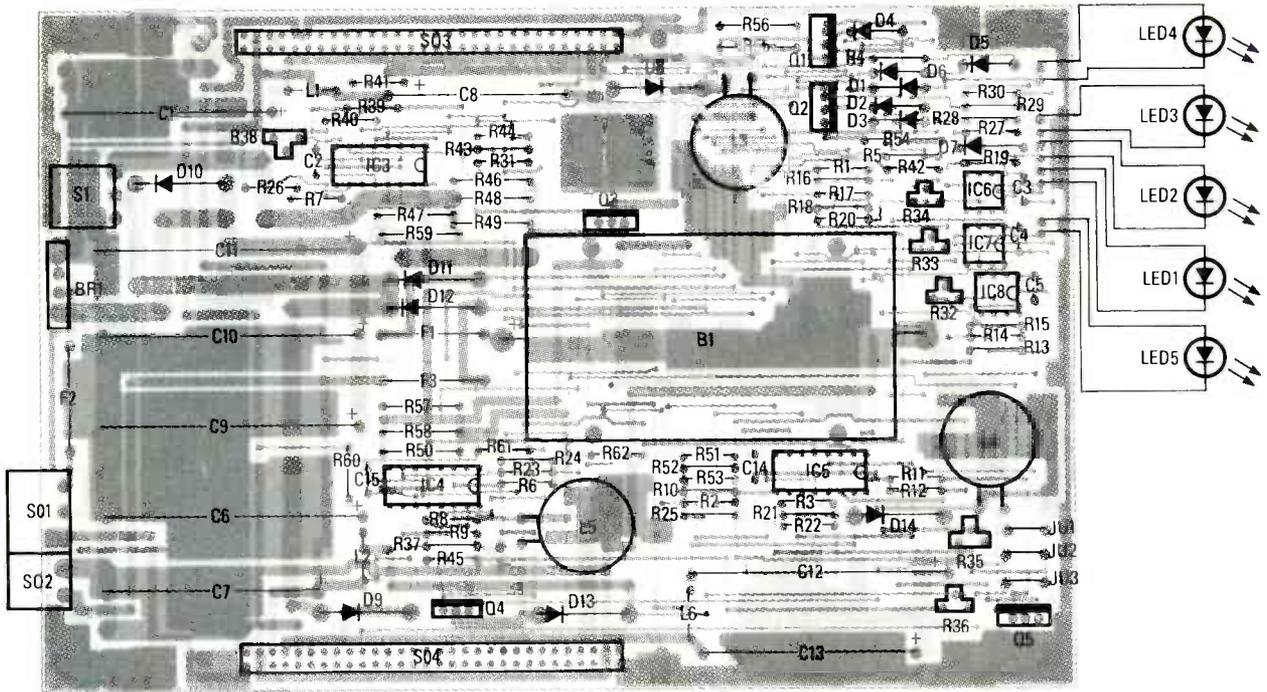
PARTS PLACEMENT DIAGRAM. Follow this when constructing the PC board.
